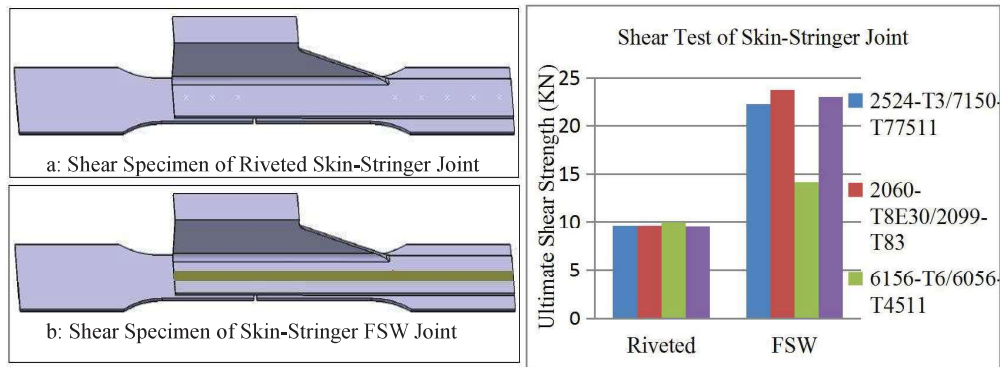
Shear Test of Riveted/Welded Skin-Stringers Joint
